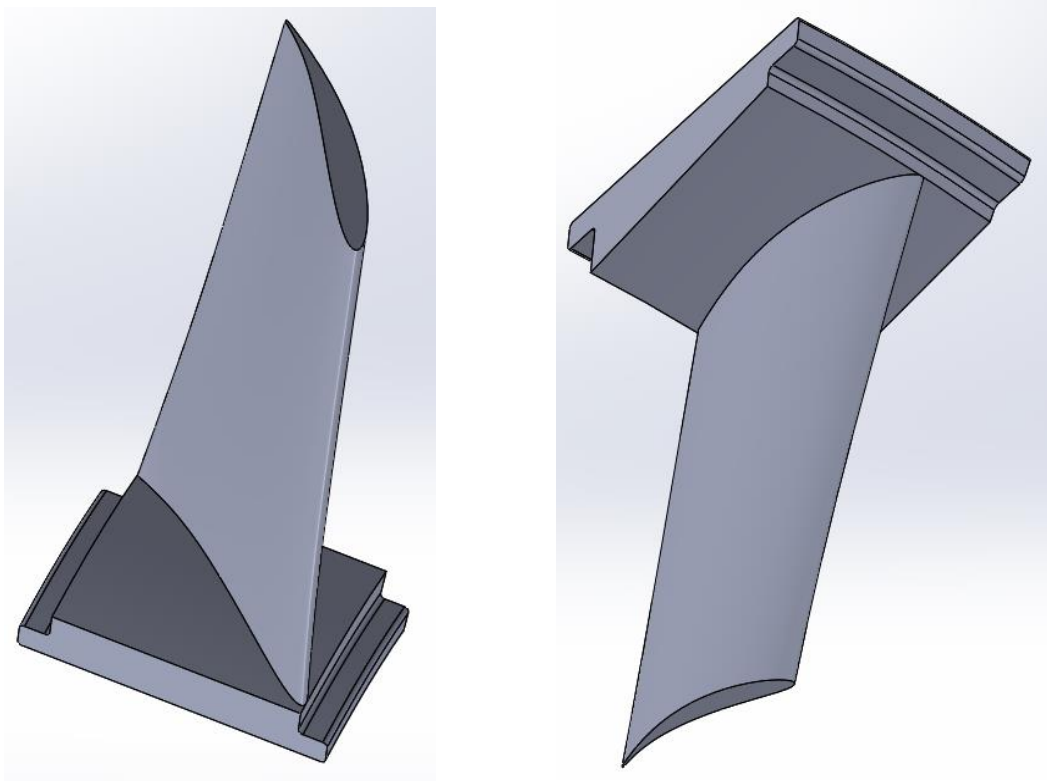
Rotor blade (left) and stator blade (right) of LP stage #1
